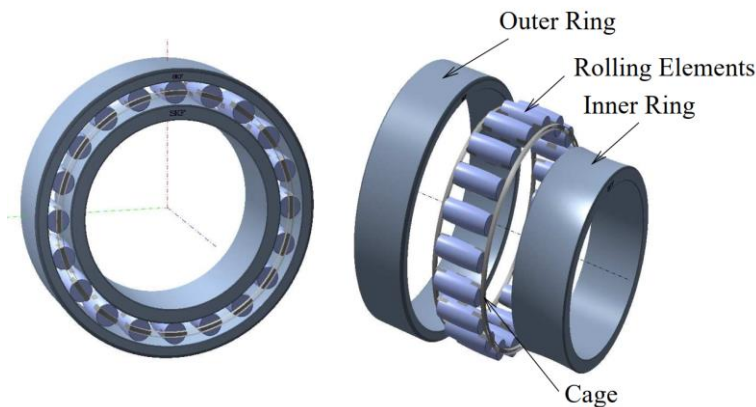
Exploded view of the tested toroidal bearing (CARB®) [55]
